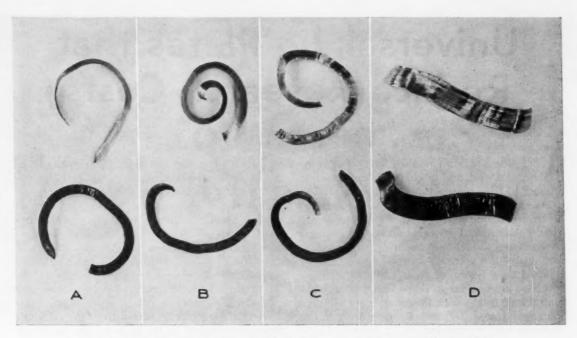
Titanium chips which are essentially non-segmented are produced on a rigidly constructed milling machine. A cutting speed of 75 surface feet per minute was used. Chip thicknesses, in inches, are A, 0.010; B, 0.015; C, 0.020; and D, 0.025.
